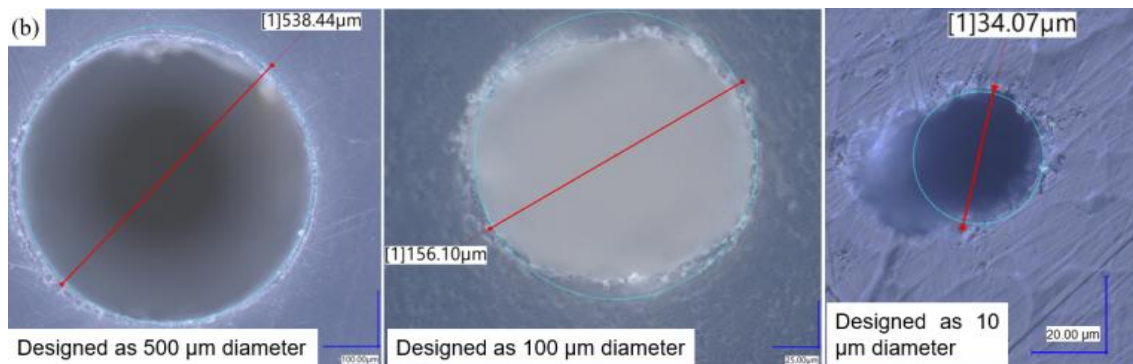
Received laser drilled PFA sheet under microscope check (the PFA sheets are properly cleaned and dried before checking)
